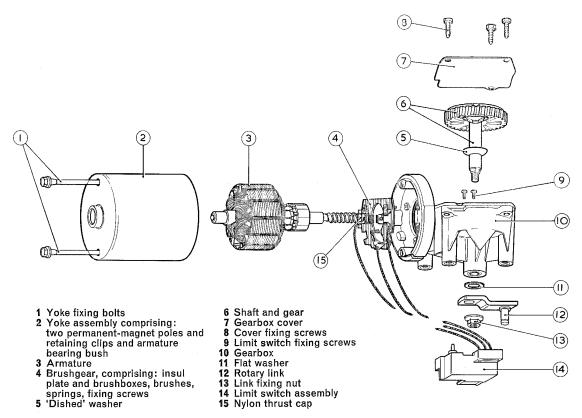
Windshield Wiper Motor Model 15W (two-speed)
